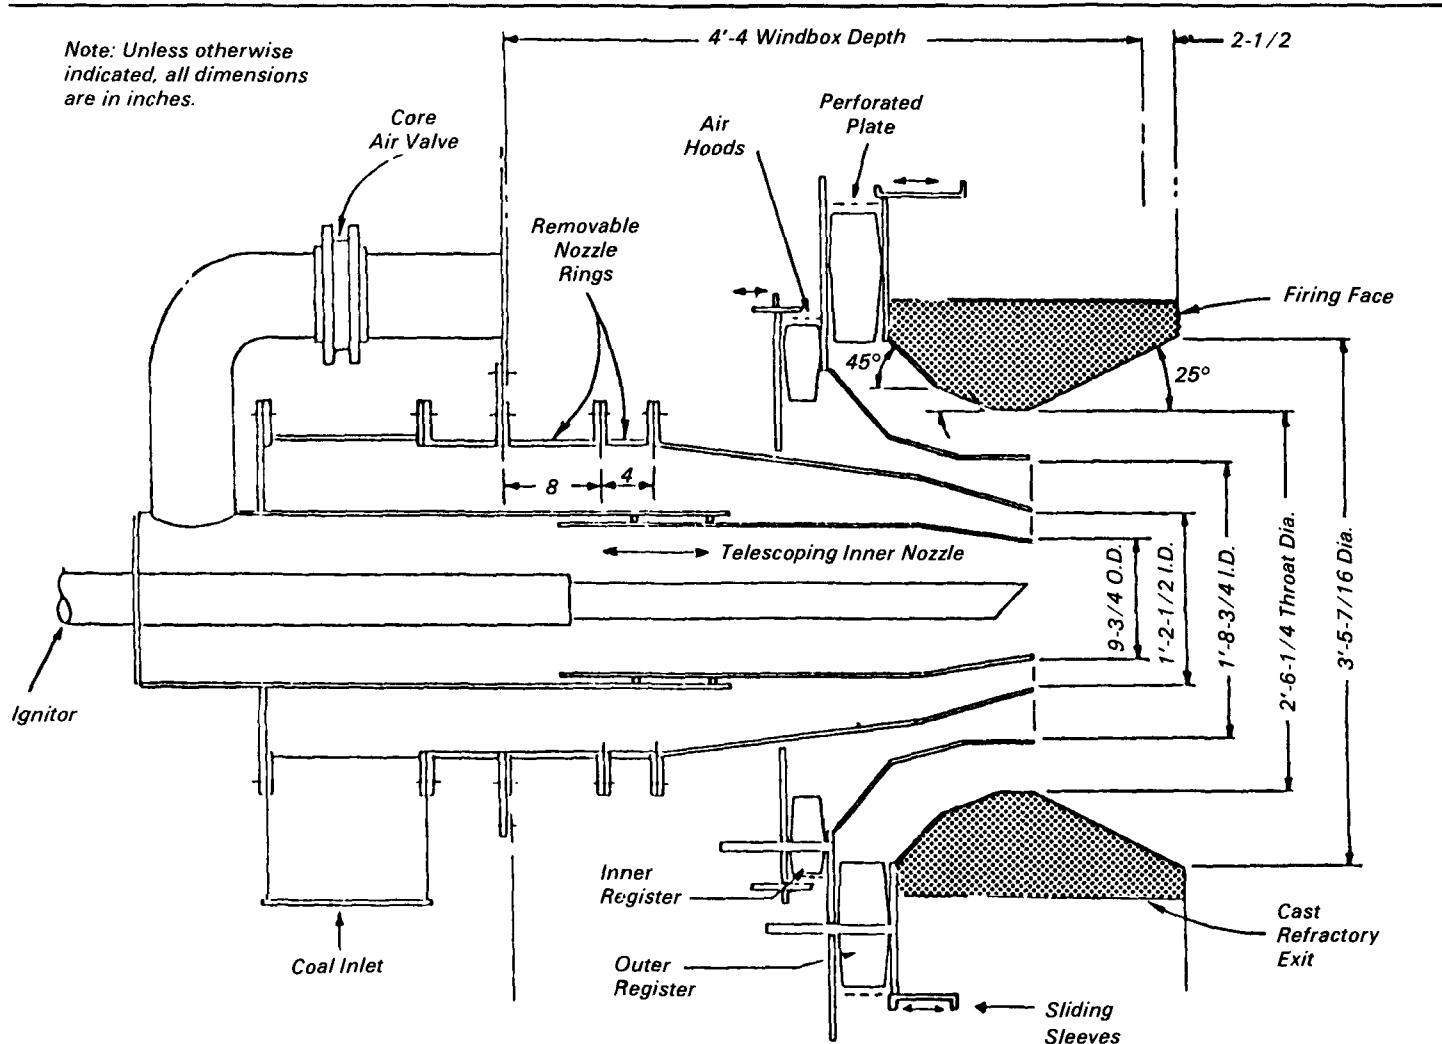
Cross section of industrial prototype burner based on Foster Wheeler design without tertiary air ports.
